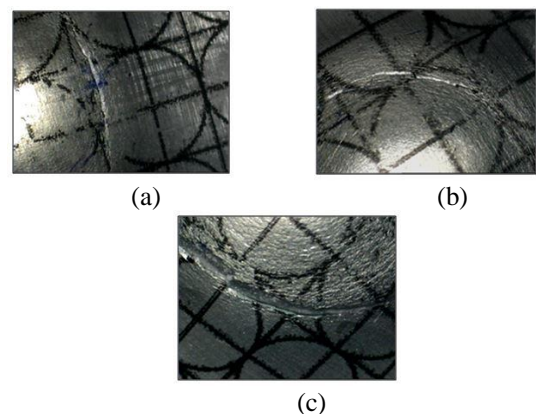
Failure Locations for UV marking during Erichsen test method: a) 0.5mm thick blank; b) 1.0mm thick blank; c) 1.6mm thick blank
